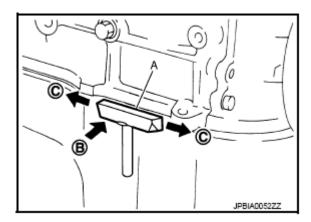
Cutting Liquid Gasket Sealing Using Seal Cutter Courtesy of NISSAN NORTH AMERICA, INC.
